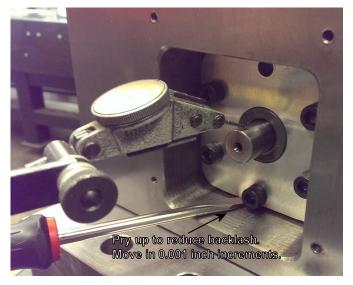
Pry up on bearing mount to reduce backlash, move in 0.001" increments, tighten, retest backlash at rotary table face.
